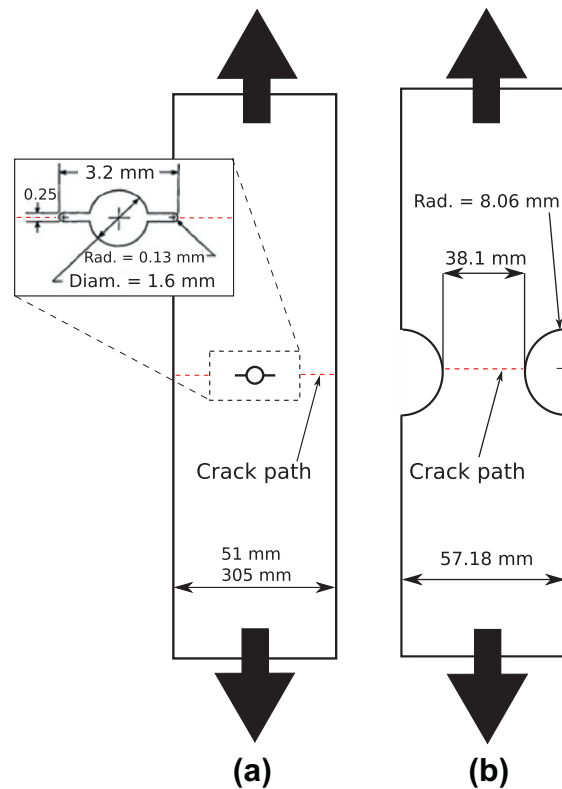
Geometry of the specimens. (a) Specimen used to investigate fatigue crack growth. (b) Specimen used to investigate the total fatigue life.
